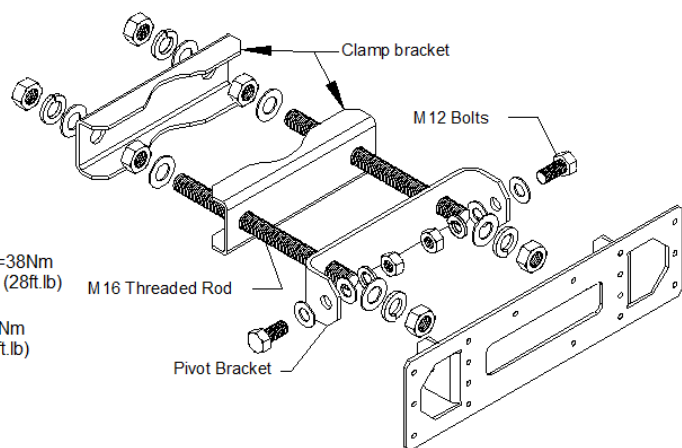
Fixed Downtilt Mounting Bracket Exploded Assembly
